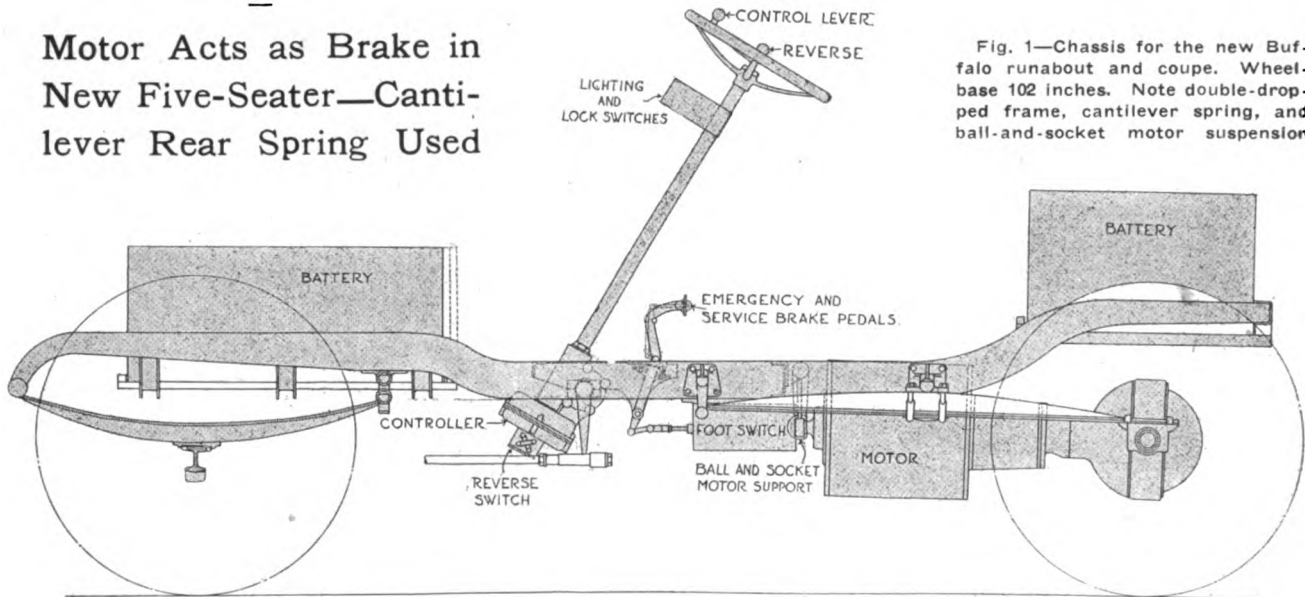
Chassis for the new Buffalo runabout and coupe. Wheel-base 102 inches. Note double-drop frame, cantilever spring, and ball-and-socket motor suspension
